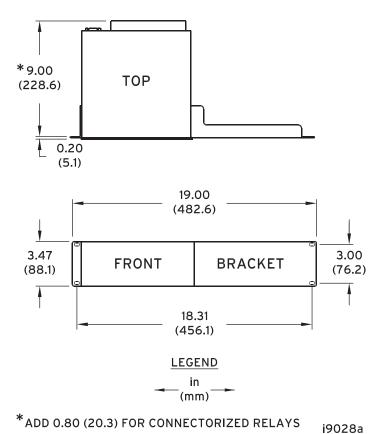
Relay Dimensions and Drill Plan for Mounting an SEL-501 Relay with Rack Mount Bracket 9100 (bracket on right side front view)
